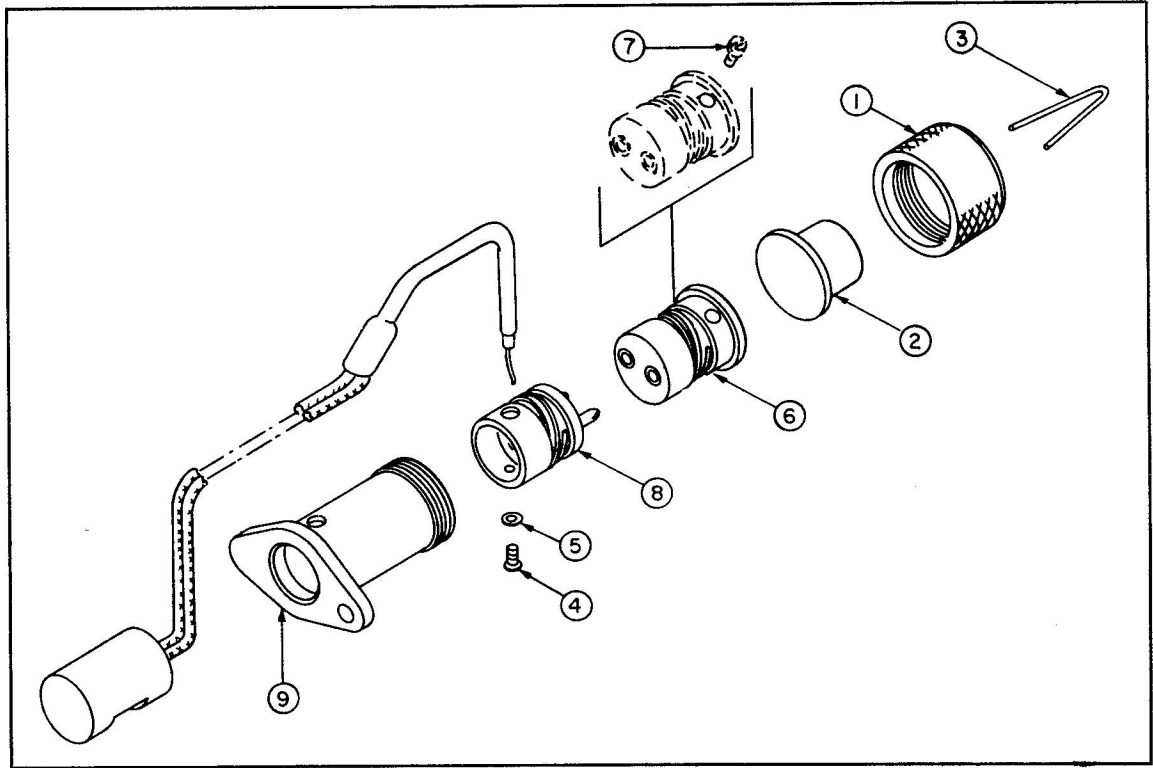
Exploded View - Compass - Lighting System and Bracket Assembly
